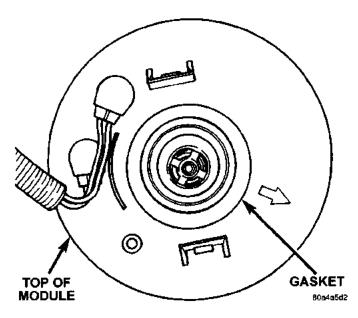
Fuel Filter/Fuel Pressure Regulator Gasket
